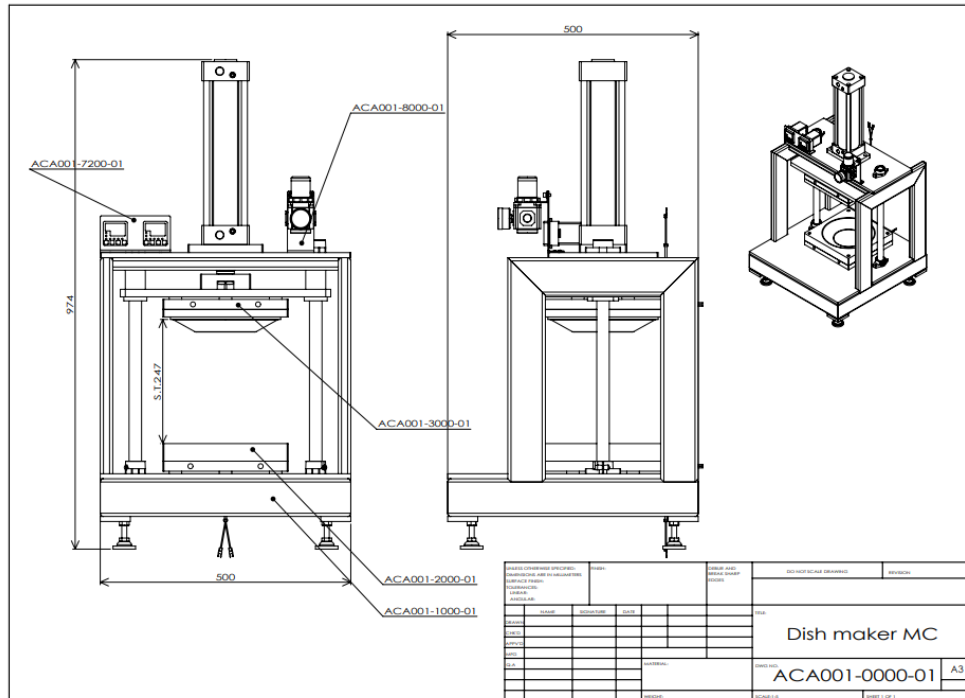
Sketch of Packaging Forming Machine from antimony leaf for Environment
